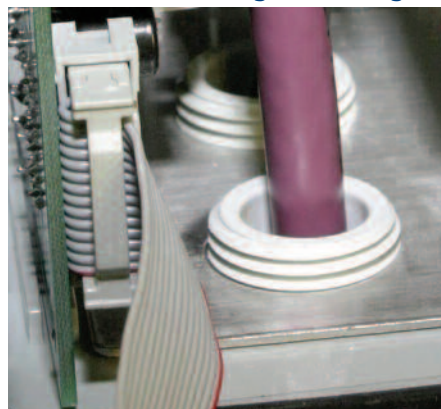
Proper enclosure opening locations for cable installation.
